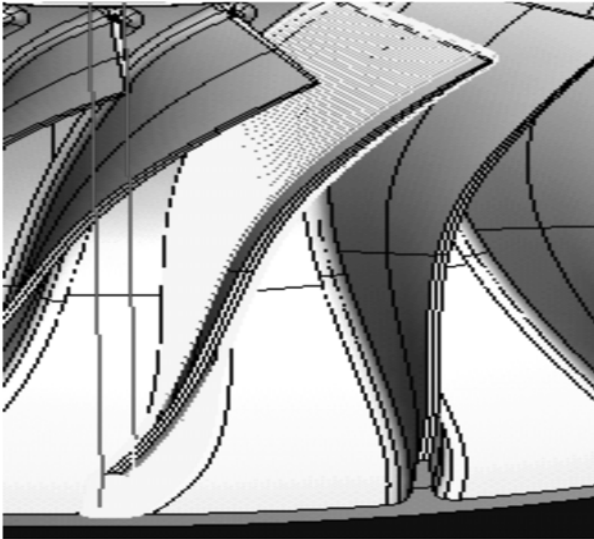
FINISHING OF IMPELLER BLADES AND LEADING/ TRAILING EDGES
